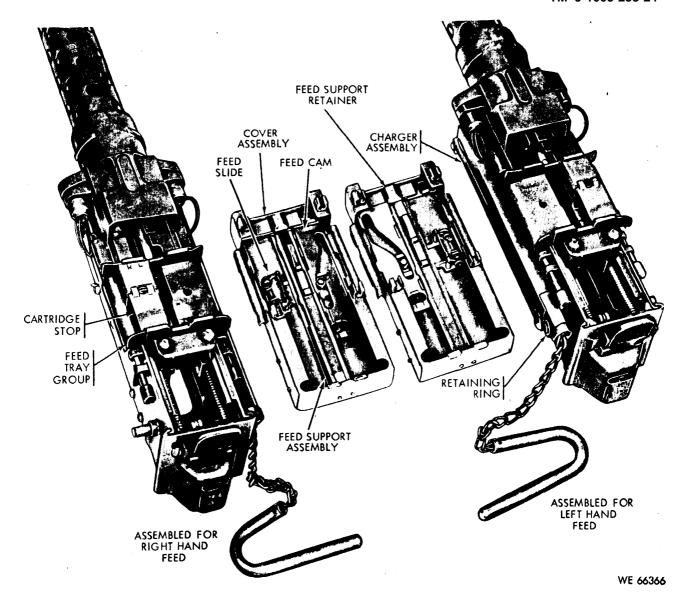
7.62-MM Machine Gun M 73 assembled for right and left hand feed.
